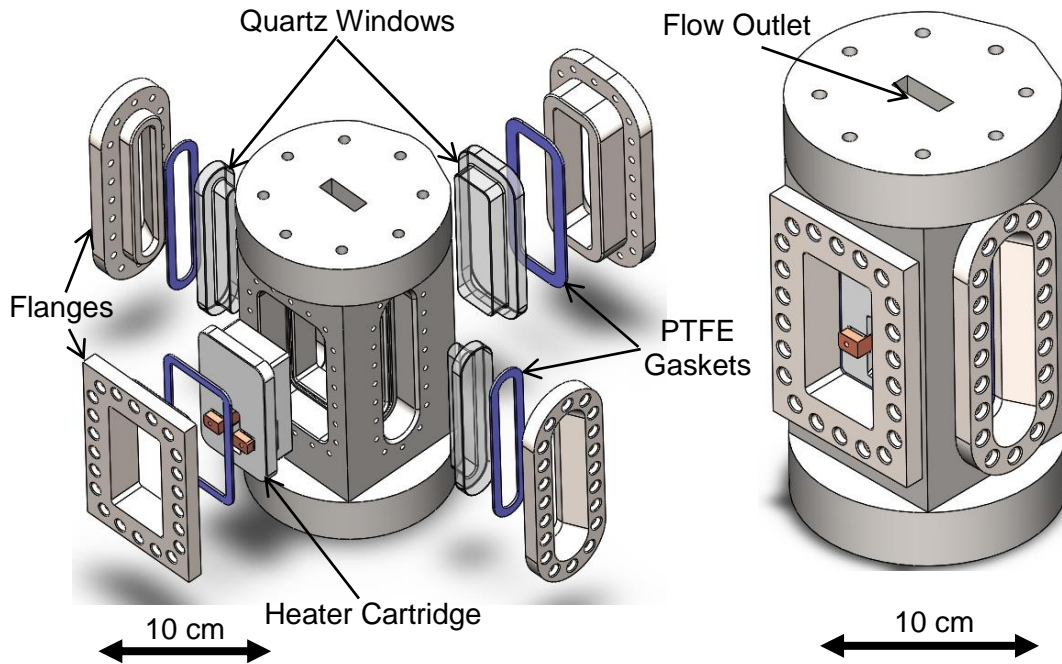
Exploded (left) and assembled (right) views of the low pressure flow boiling test section.
